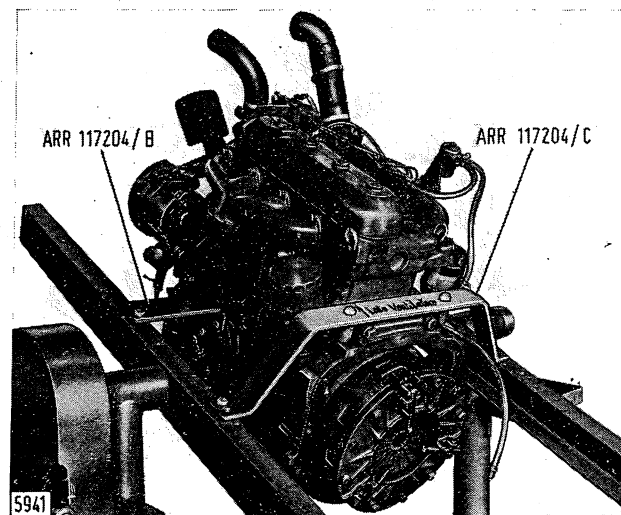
/11 - Installing engine on turnover stand ARR 2216 with front bearer brackets ARR 117204/A/B and rear bracket ARR 117204/C.
